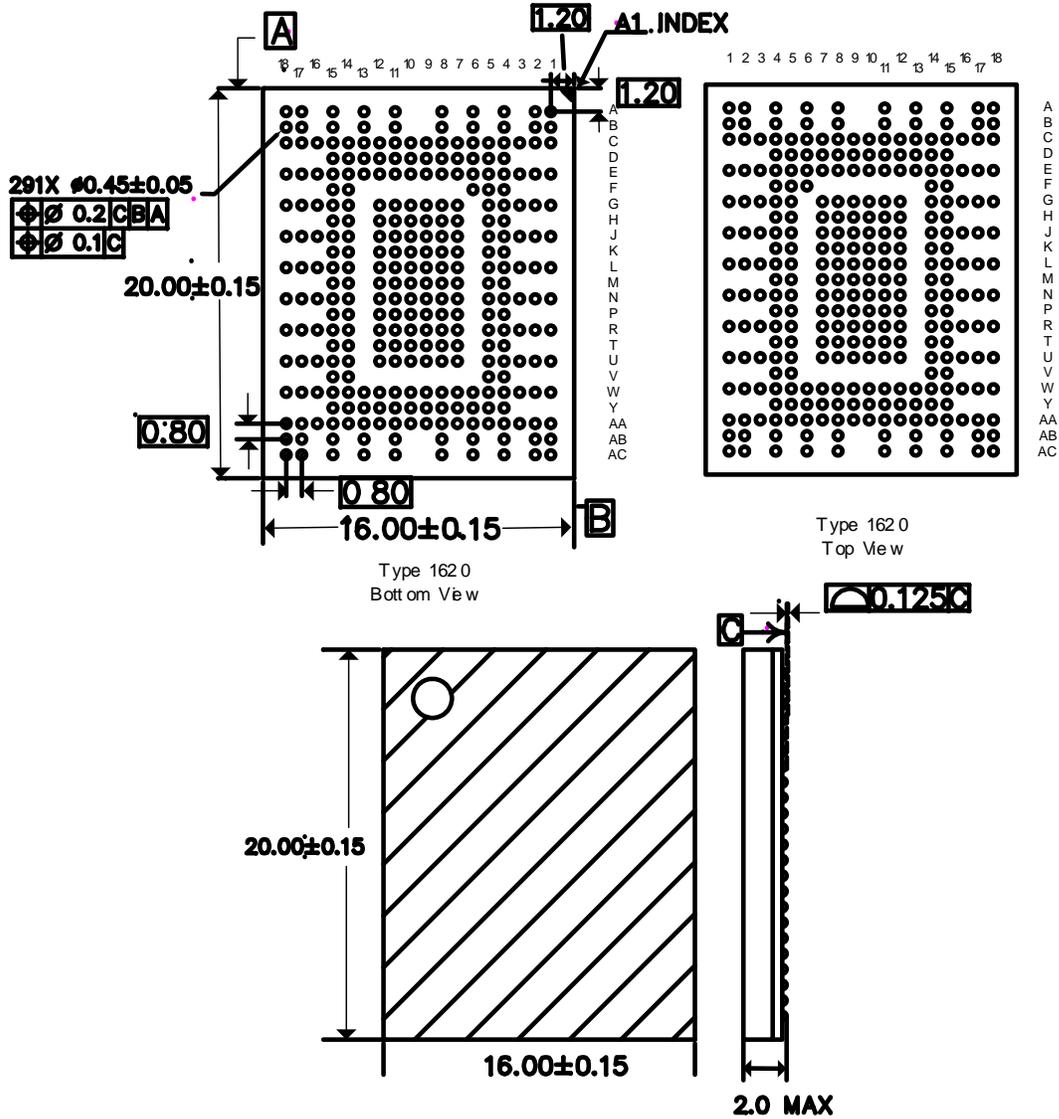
M.2 Type 1620-S5 Mechanical Outline Drawing Example
